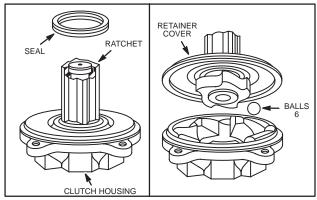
SEALED CLUTCH ASSEMBLY (CURRENT STYLE)
